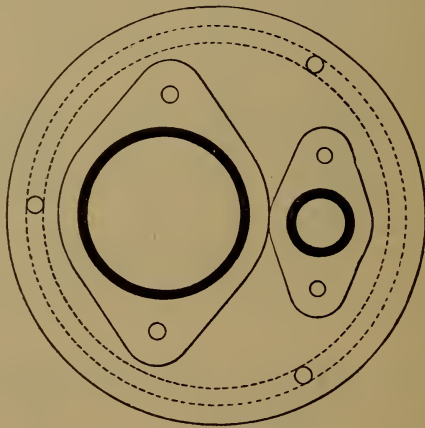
CAP AND GLAND FOR WELL HEAD.
